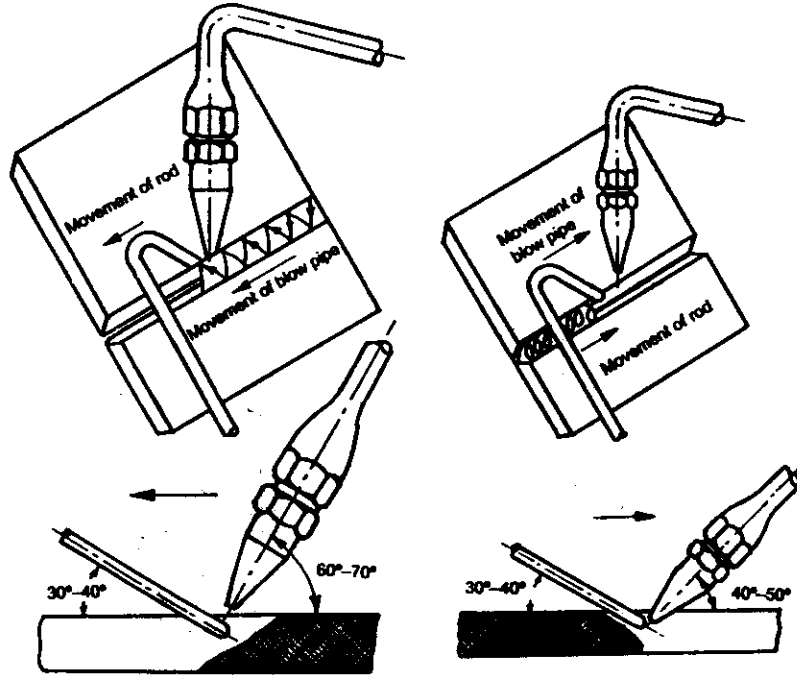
Leftward welding Figure 9.6 Rightward welding
